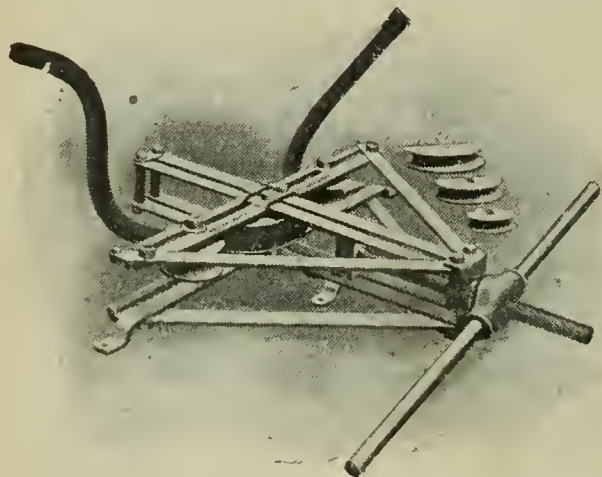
THE "SKOLZ" TUBE BENDER.
